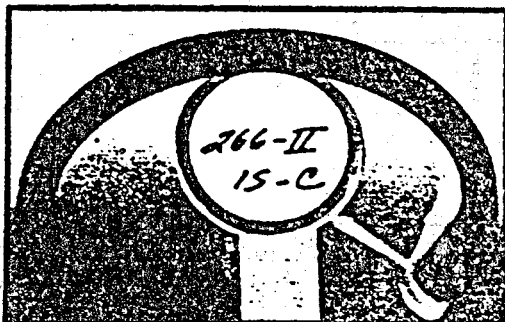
Post Mortem O-rings SIM Test Seals After 22 Hrs.
